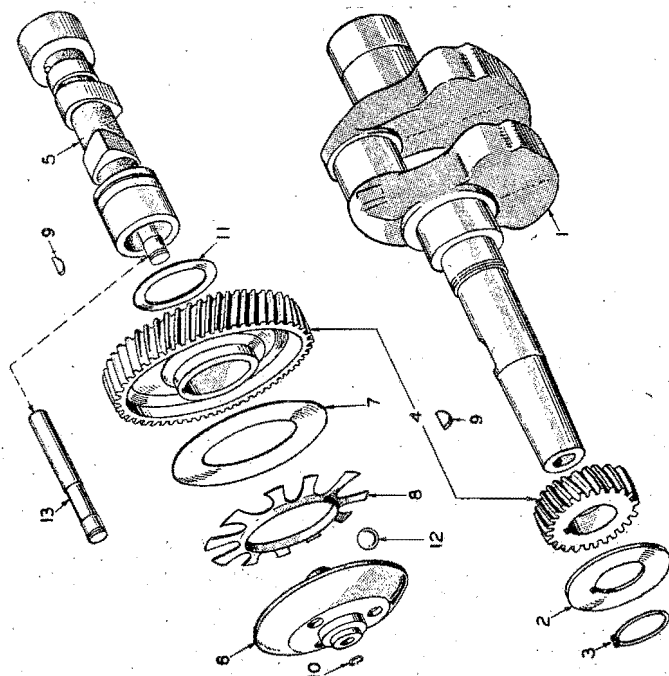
CRANKSHAFT, CAMSHAFT AND GOVERNOR CUP GROUP
